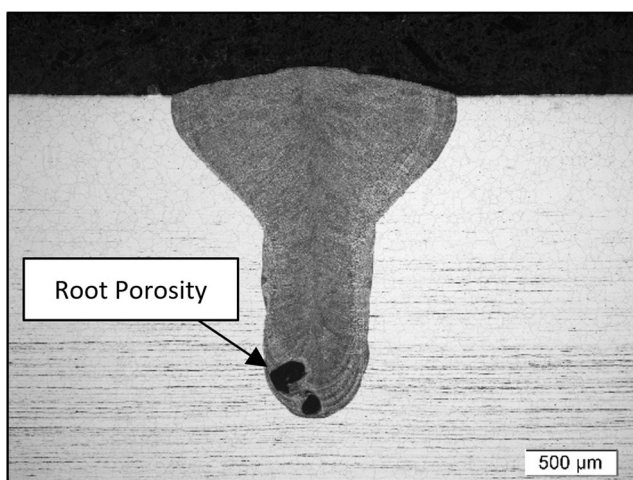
Keyhole laser weld showing pores trapped near the root caused by keyhole instability [144]
